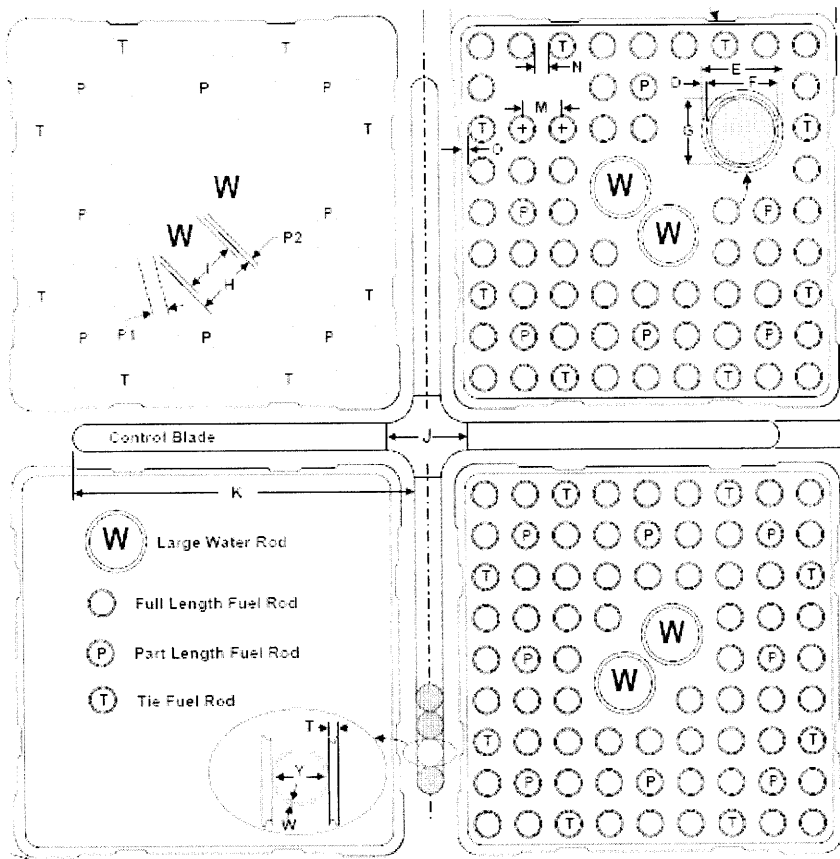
The Reference Assembly (Dimensions given in Table-3.2)
